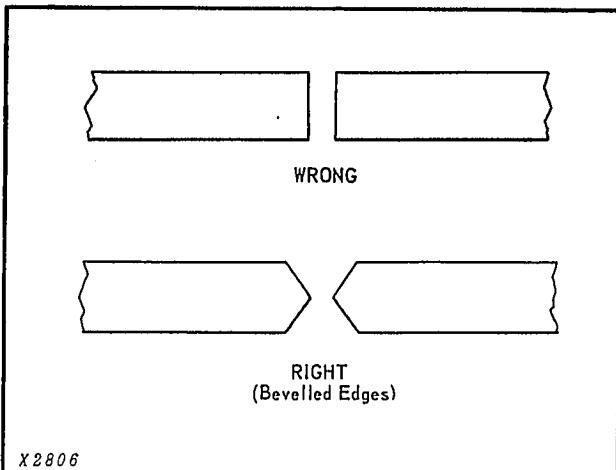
Bevelling Metal Joints Before Welding
